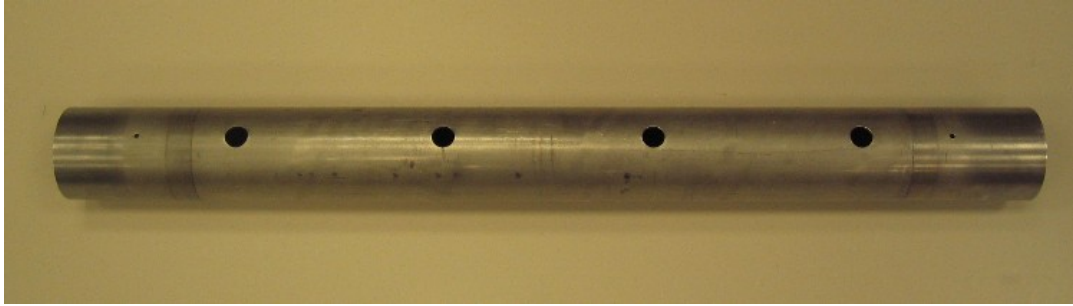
Auxiliary tube to align smaller diameter core (HRC). 4 bolts tighten the tube.
